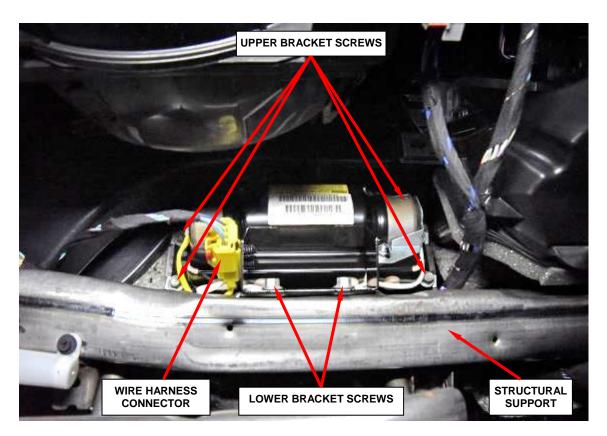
PAB Housing, Inflator and Cushion to be Removed a Unit (View through Glove Box Opening)
